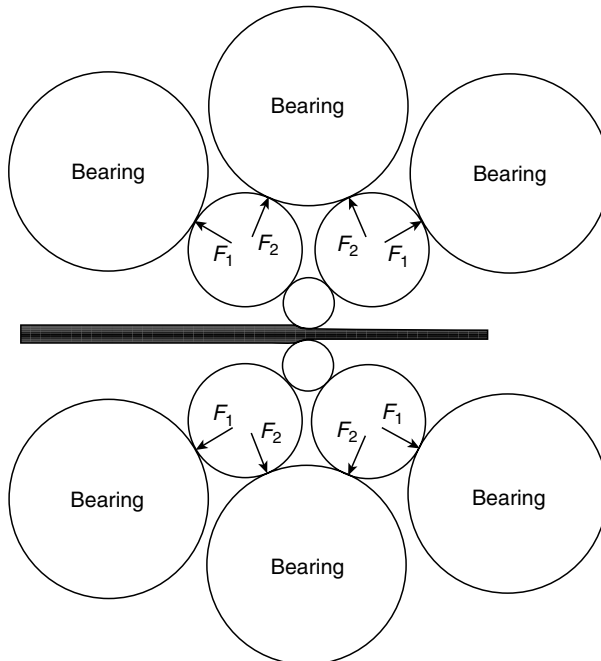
Cluster mill assembly showing backup roll bearing loading.
